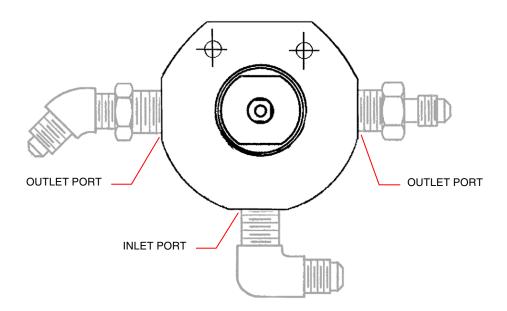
Port Locations on Fuel Selector Valve, Piper P/N 491-947
